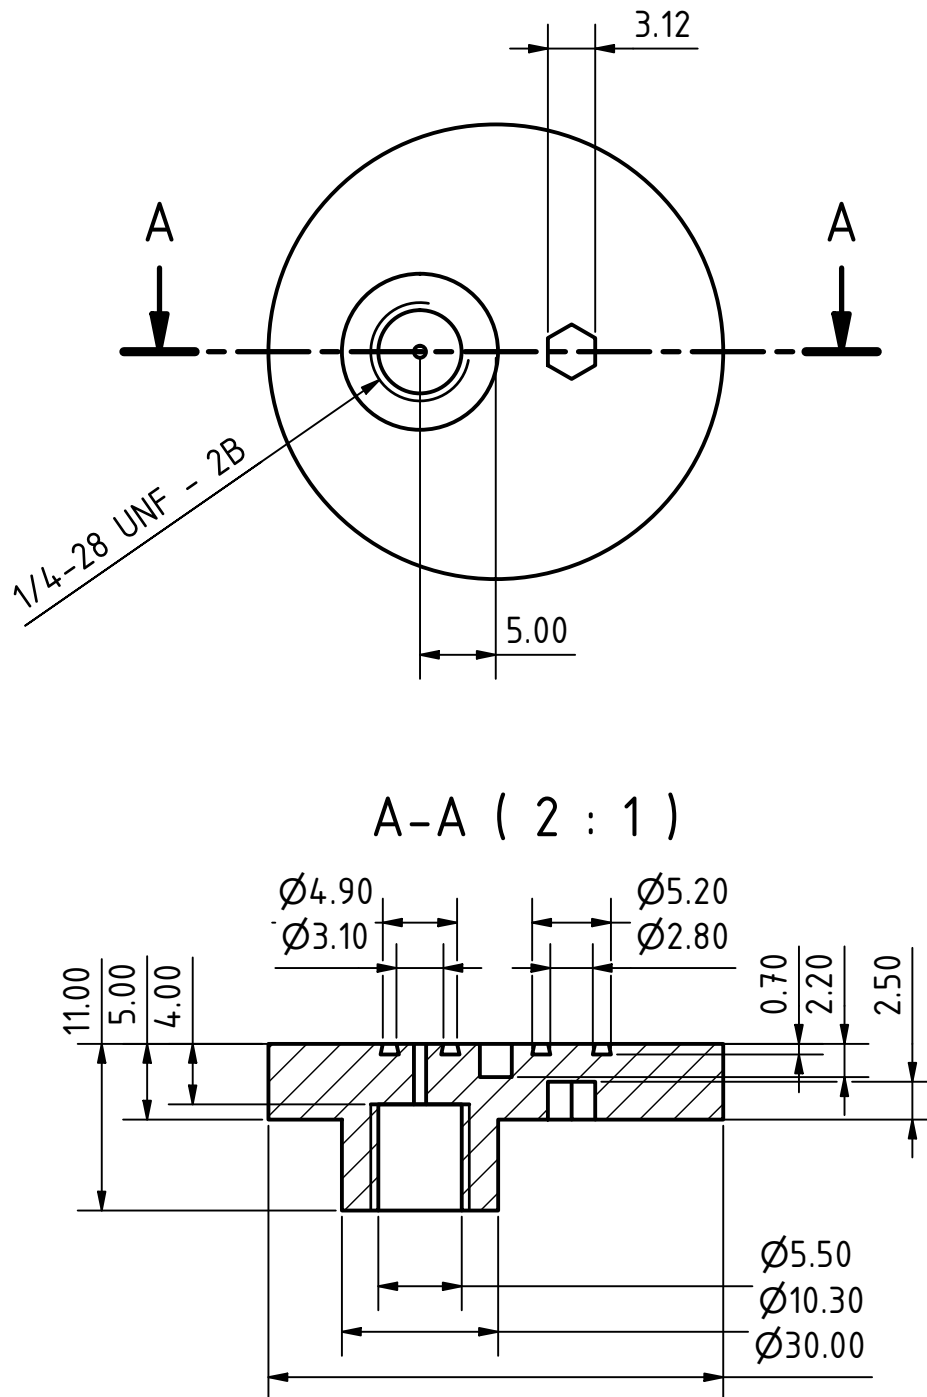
Technical drawing of the rotor of the test valve: top view (top) and section view (bottom) with scale 2:1. The hexagonal recess in the surface can be used to manually turn the rotor using an Allen key. All threads were cut after printing, all dimensions in mm.
